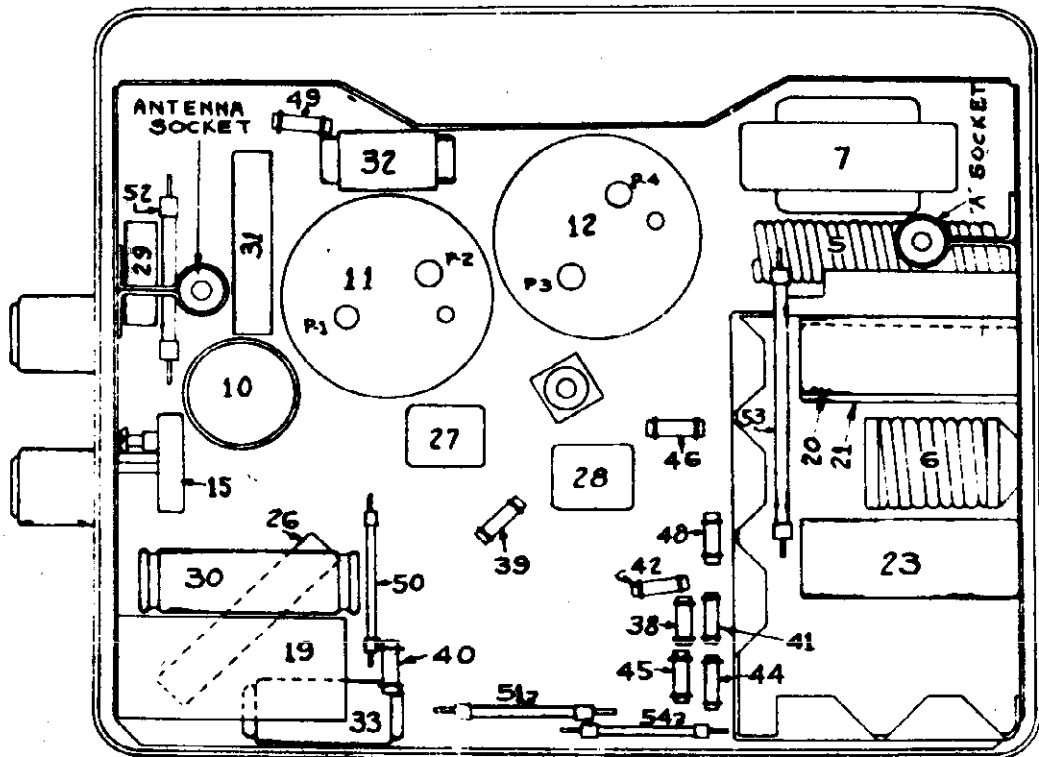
PARTS LAYOUT--BOTTOM VIEW
